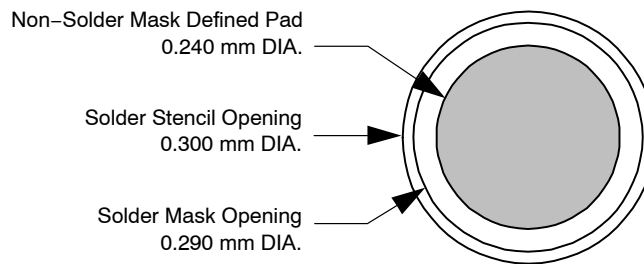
Recommended Non-Solder Mask Defined Pad Illustration
